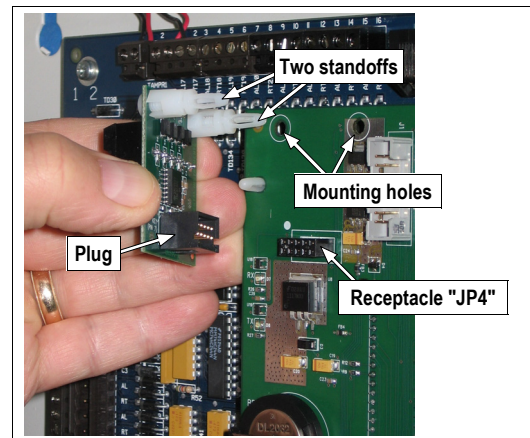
Align the two snap-lock standoffs and plug with the Accelerator board holes and receptacle.
